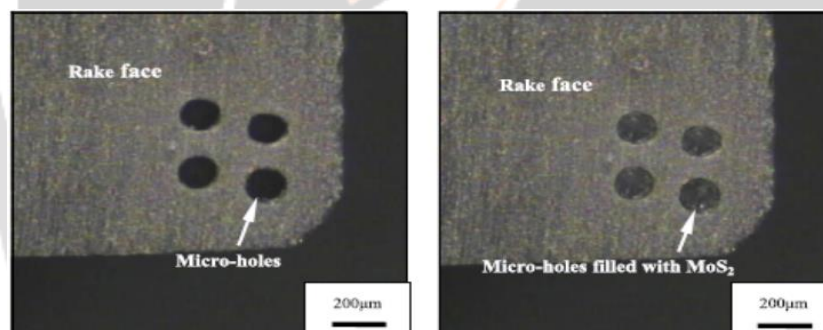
Micro-holes in the rake face of the carbide tool filled: (a) without MoS₂ (SLT-3); (b) with MoS₂ (SLT-1).
